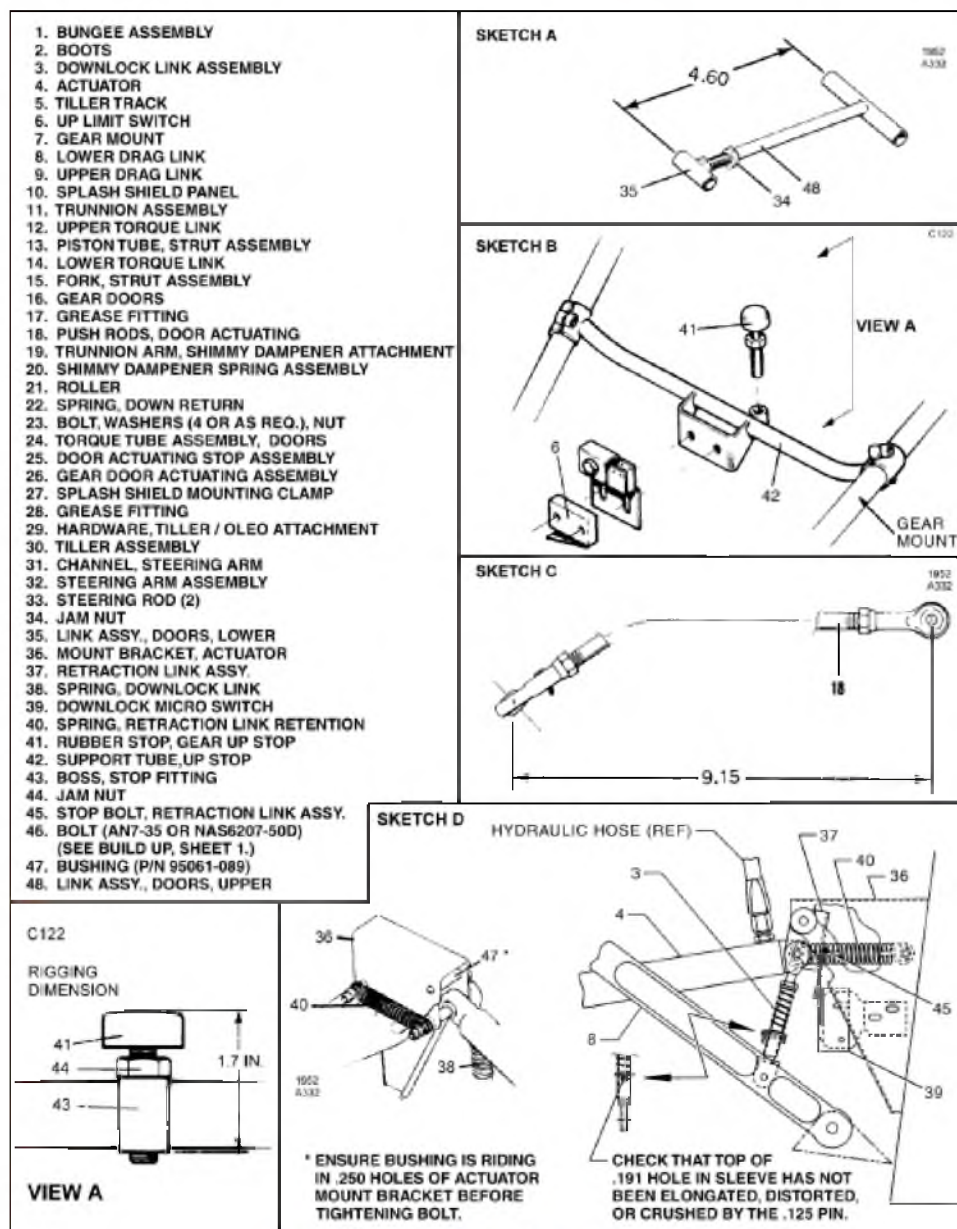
Nose Gear Installation (Sheet 2 of 2)
